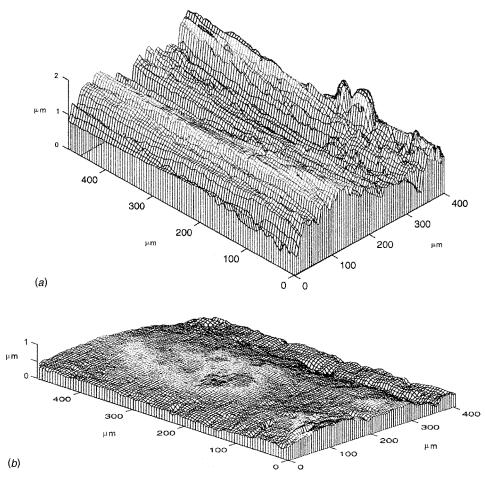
Comparison of gear tooth surface topographies as measured using a mapping interferometric microscope: (a) ground gear tooth; (b) superfinished gear tooth.
